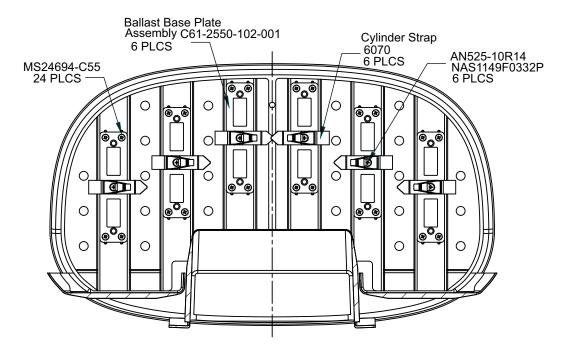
Ballast Base Plate Assembly and Cylinder Clamp Installation
